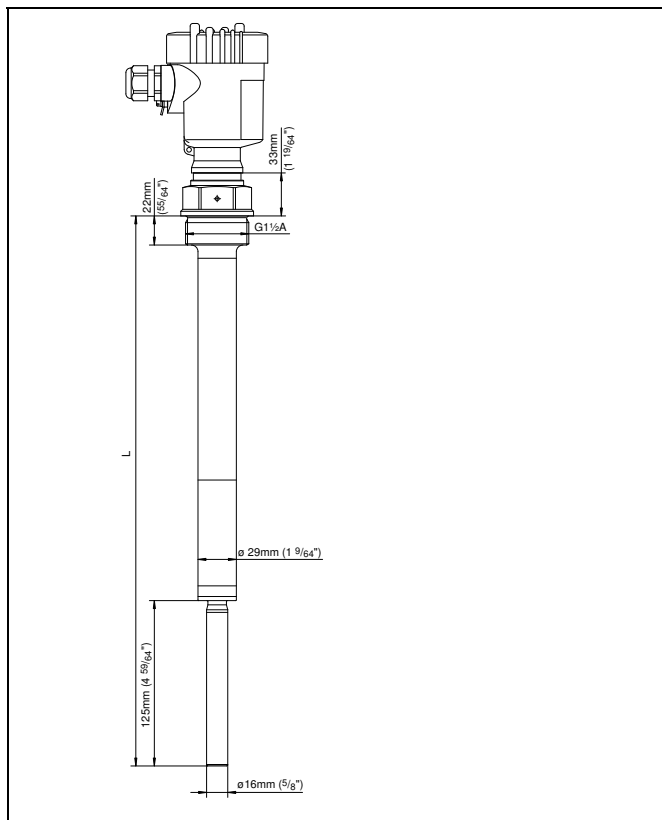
VEGA/IB 63 - threaded version G1 1/2
